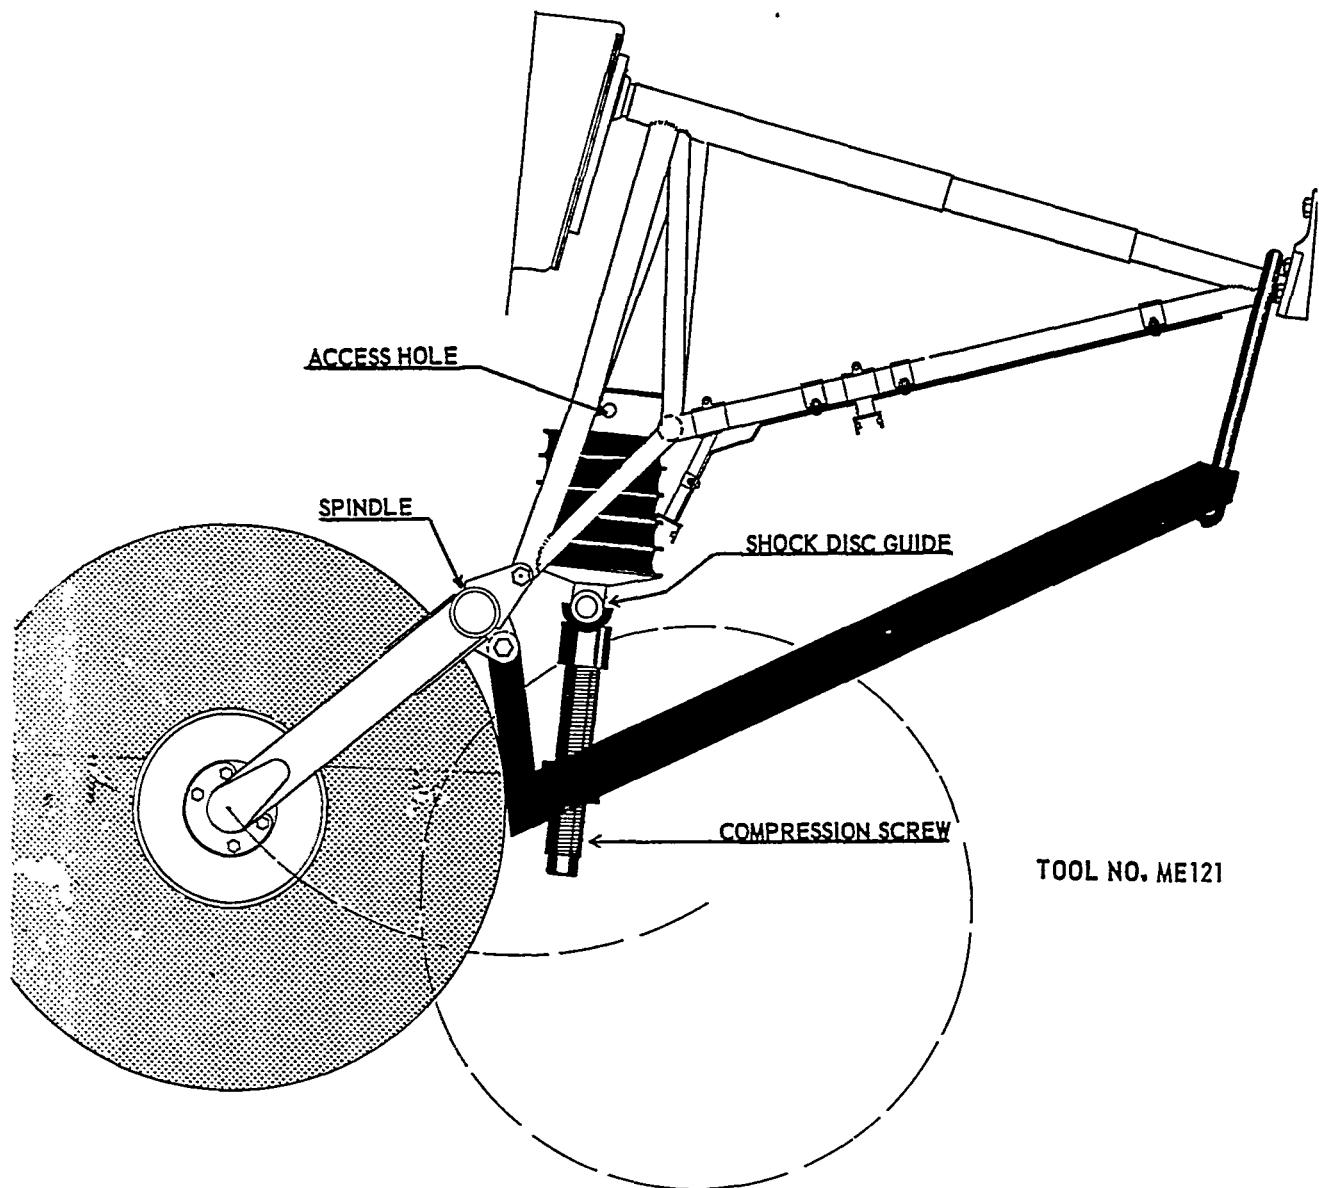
NOSE GEAR SHOCK DISC REPLACEMENT TOOL APPLICATION
